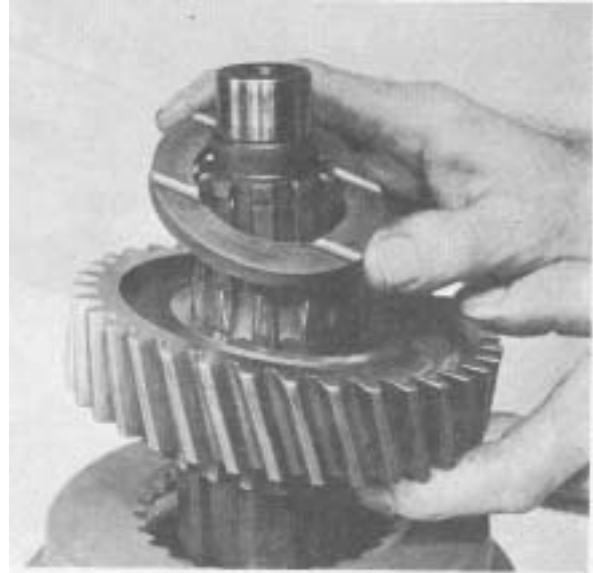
Install 3rd speed gear with clutching teeth down. Install 3rd gear locating washer.
